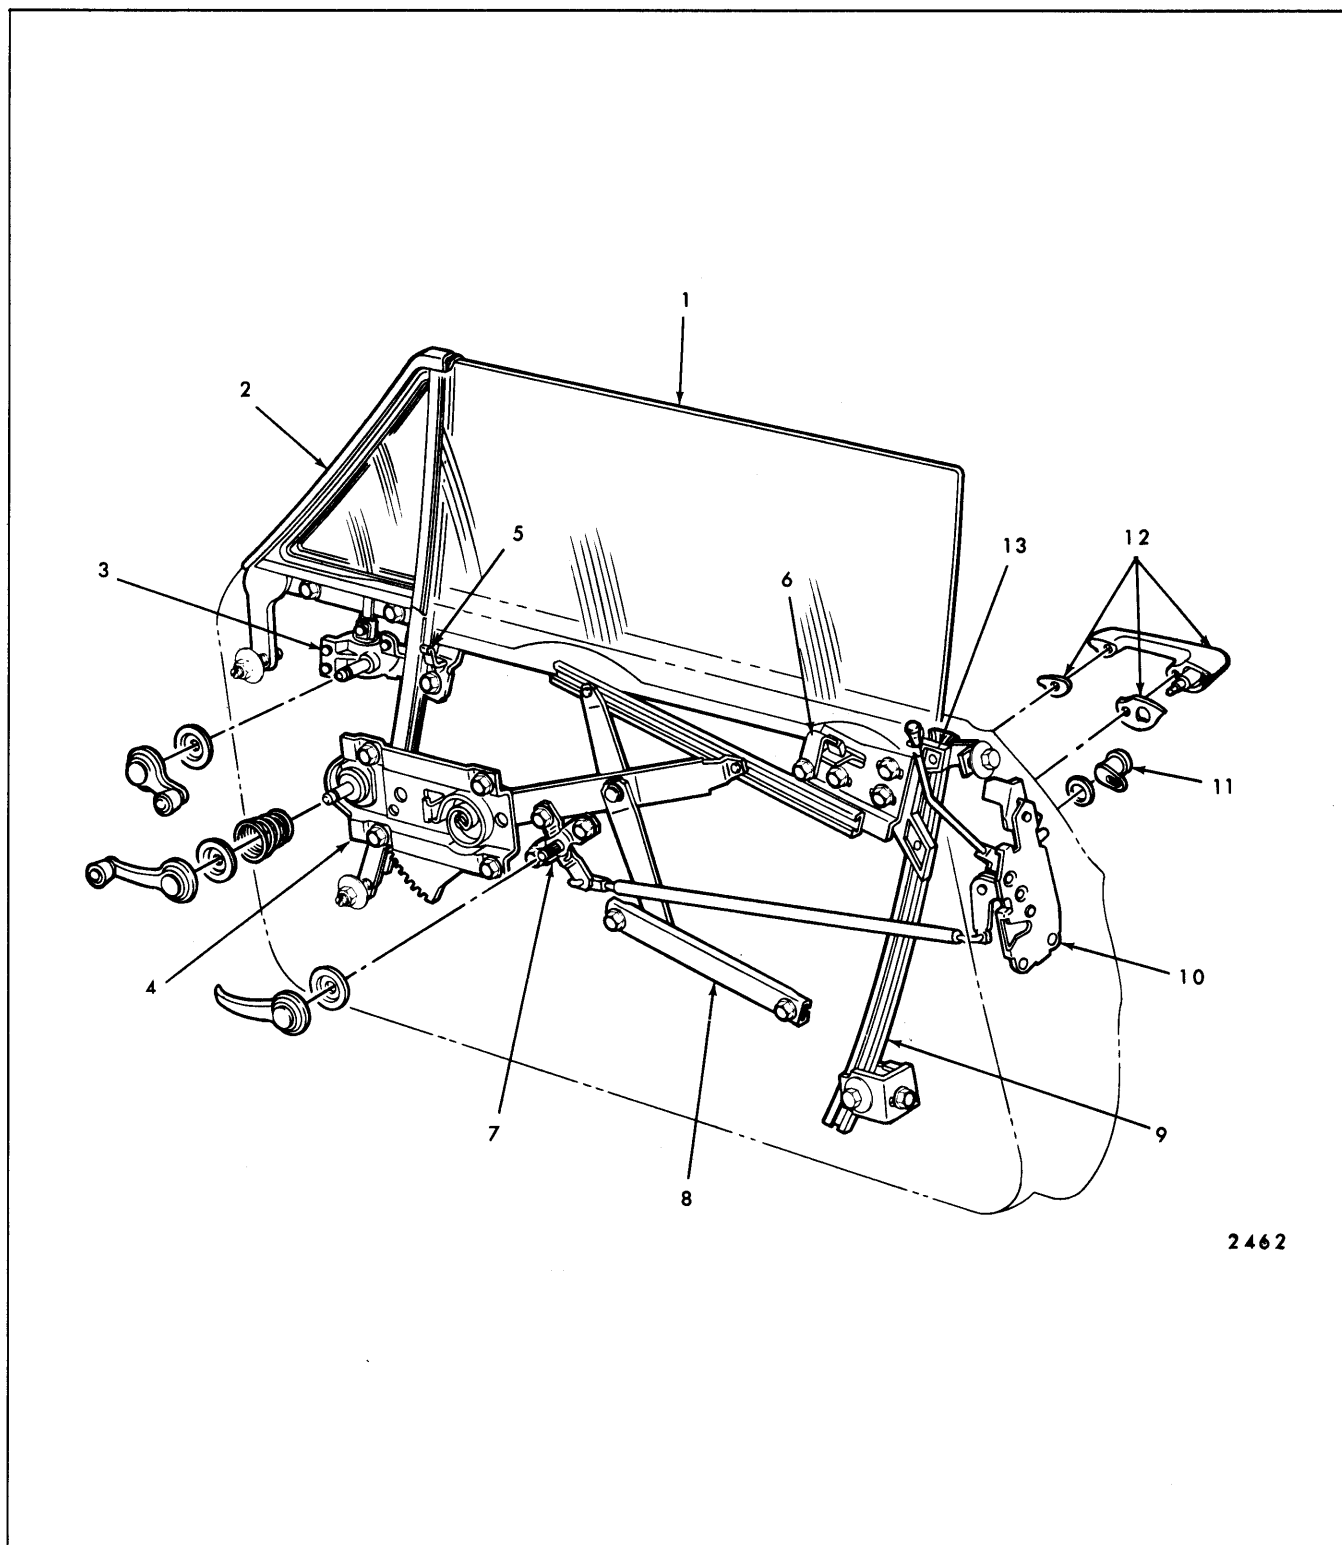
Front Door Hardware - "B-C-39-47-57-67-87" Styles Except 16647 and 26657
